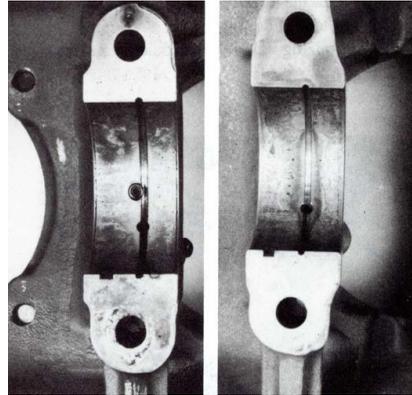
Lycoming O-320 bearing bosses. The bearing boss on the left incorporates a dowel pin to locate the bearing. A heavy wall bearing is used. The bearing boss on right does not use a dowel pin. A thin-wall high crush bearing is used. The bearing dowel functions as a locating pin. It is not designed to prevent bearing rotation. Bearing crush prevents bearing rotation.
